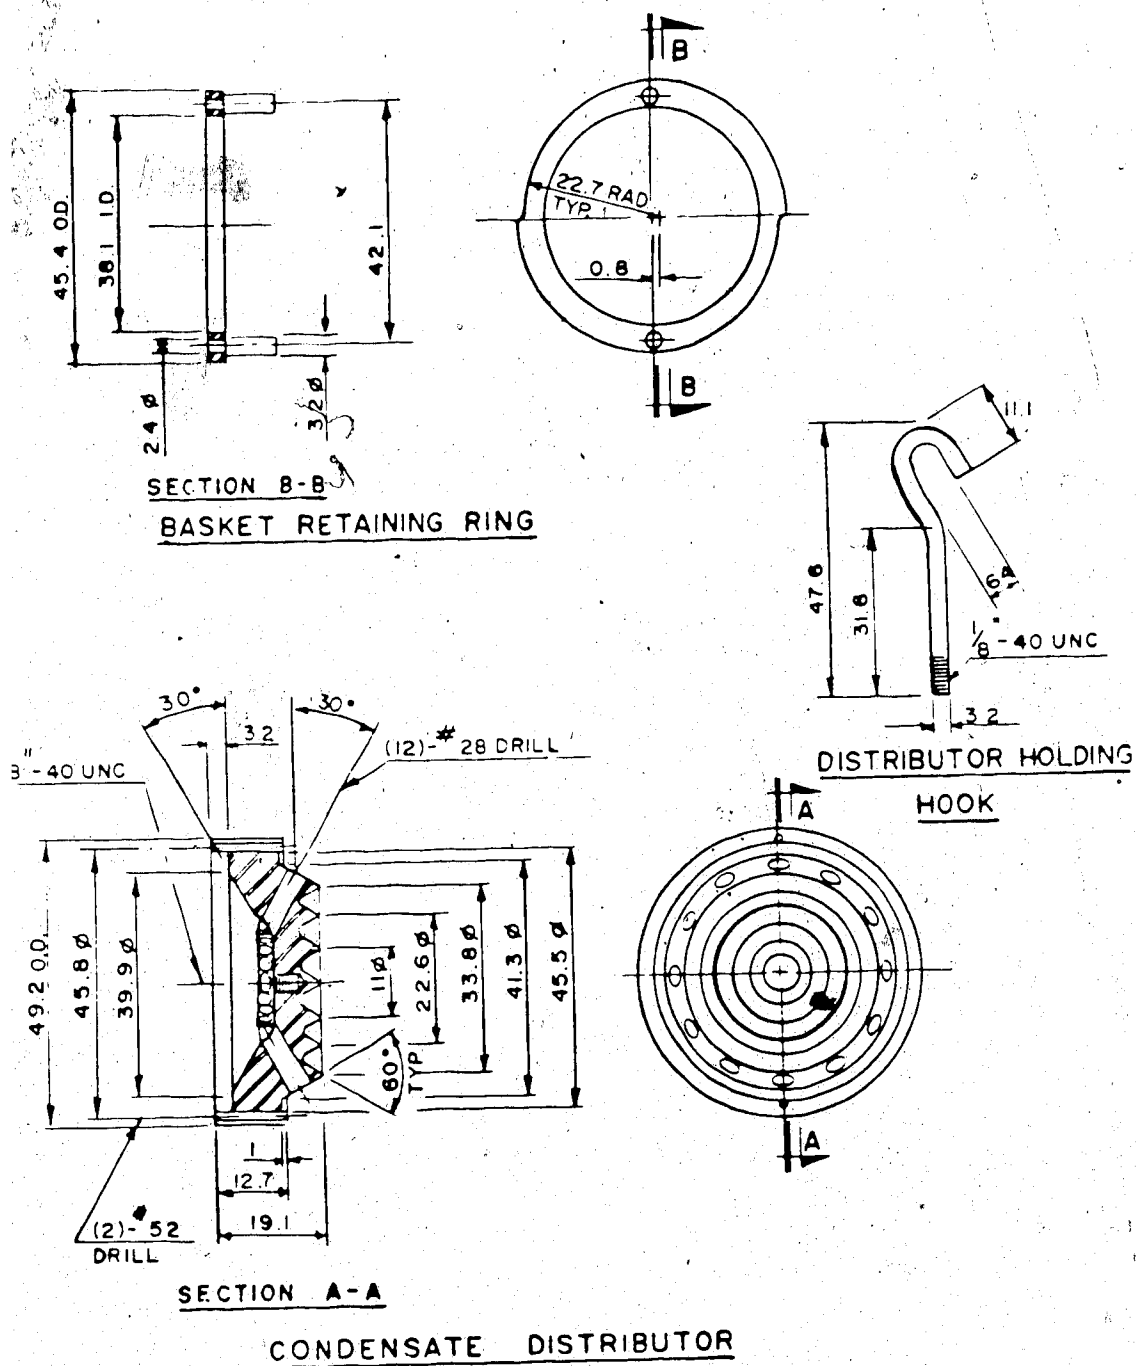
Basket retaining ring, condensate distributor and distributor holding hook.
